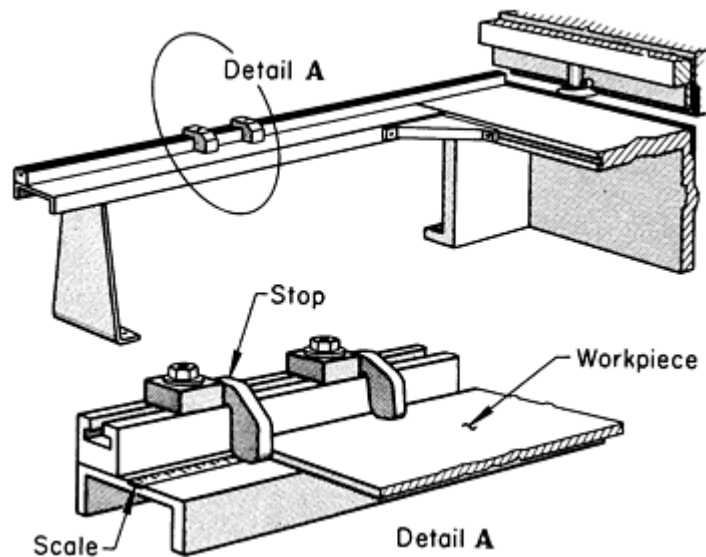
SQUARING ARM ATTACHMENT FOR POSITIONING LONG PIECES IN A SHEARING MACHINE
